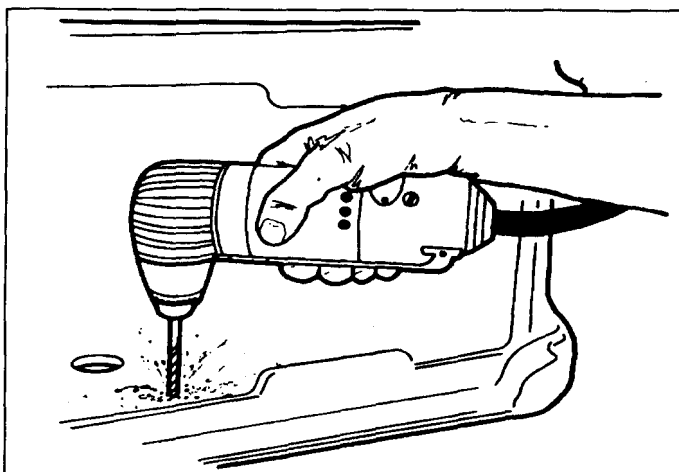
Hand drilling operation in confined space using the 90° angle drill.
